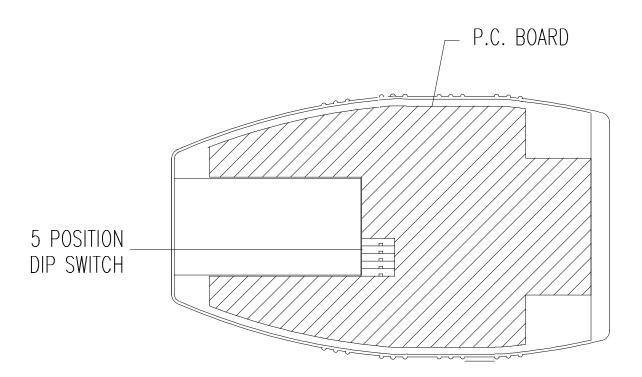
Top View of Remote Control, Top Panel Removed, Showing Location of Selector Switches.
